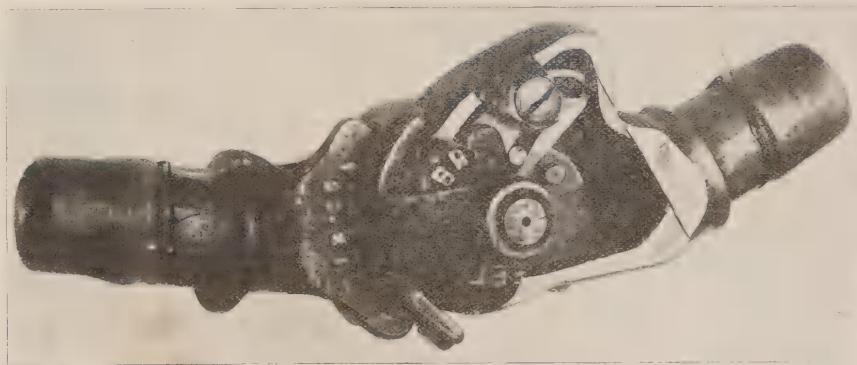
COUPLINGS SHOWN TOGETHER.
